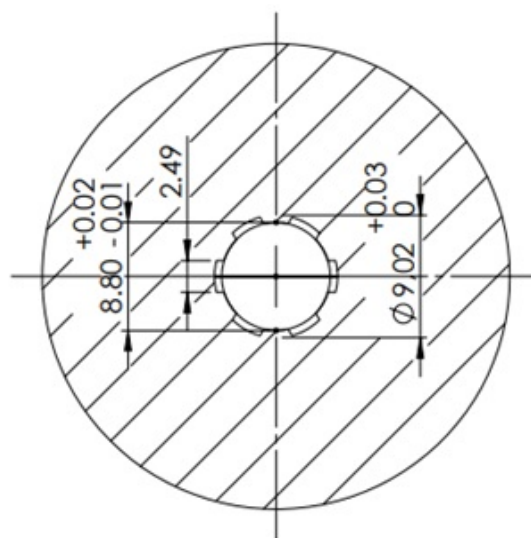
Technical drawing of the perpendicular plane projection of the pistol barrels.
